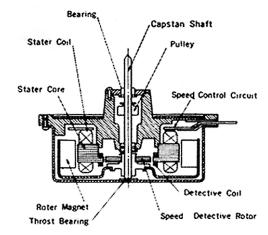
Slotted direct drive motor (Technics RS-279US).
